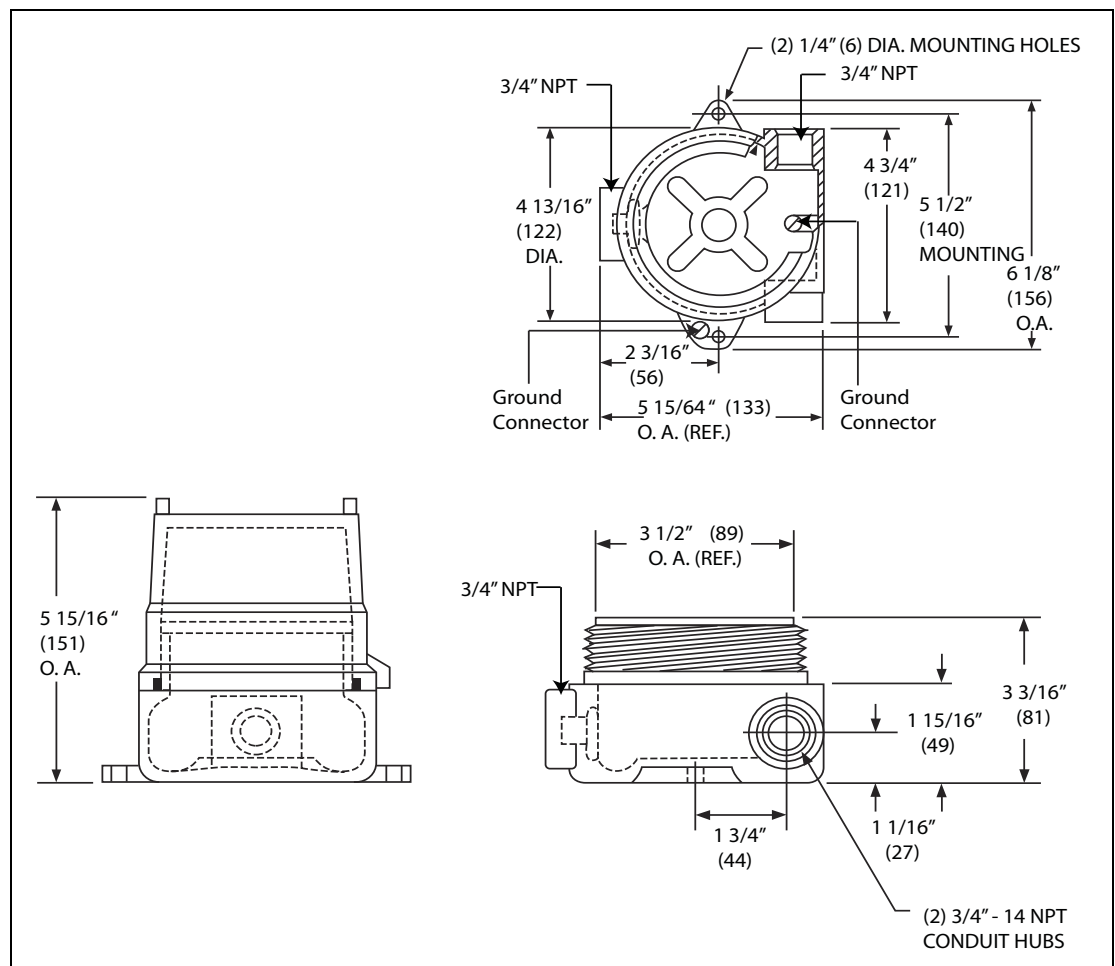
8410 Wireless Field Transceiver Dimensions
